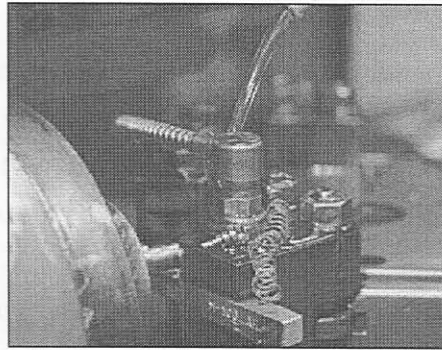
Spindler accelerometer from PCB piezotronics [251]
